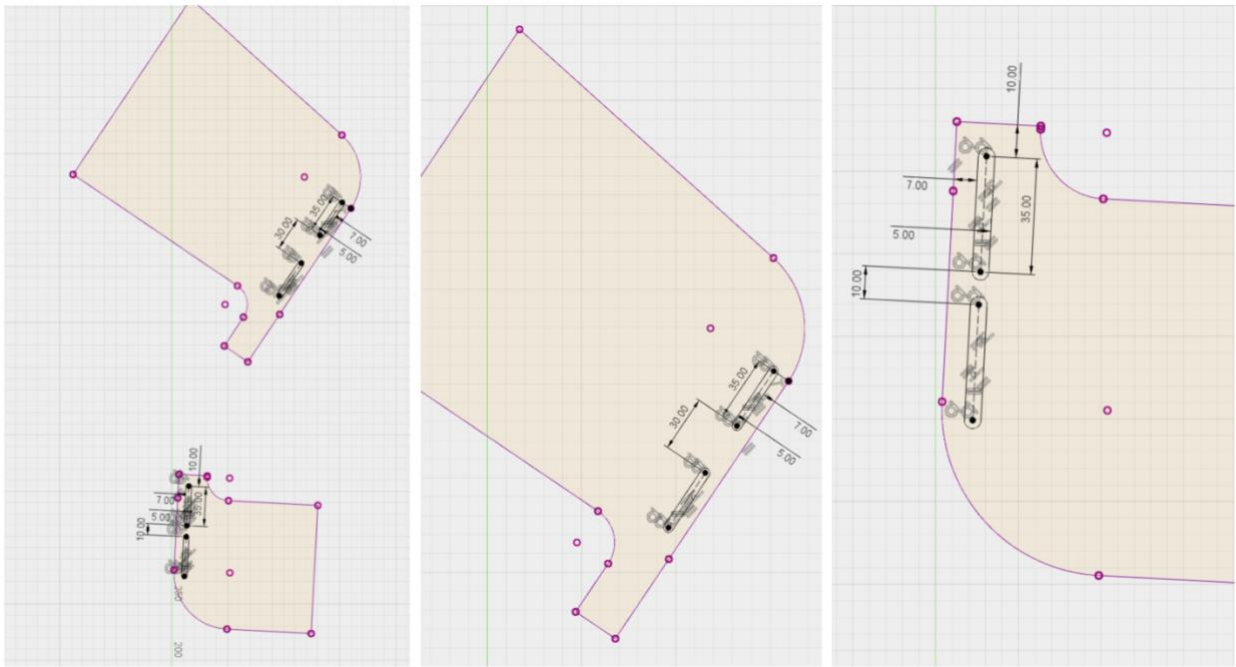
Side sketch of slot holes. All dimensions are in mm.
